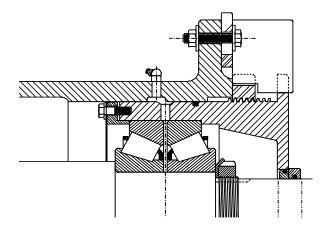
LCV Drive End Taper Roller Bearing
